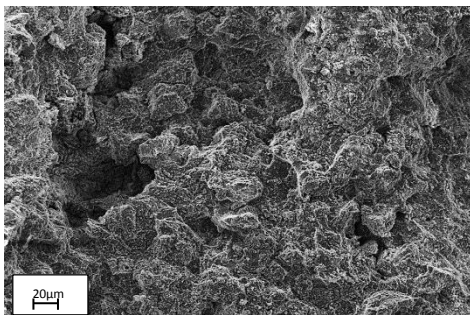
S450 U-bend specimen showing intergranular SCC on fracture surface.
